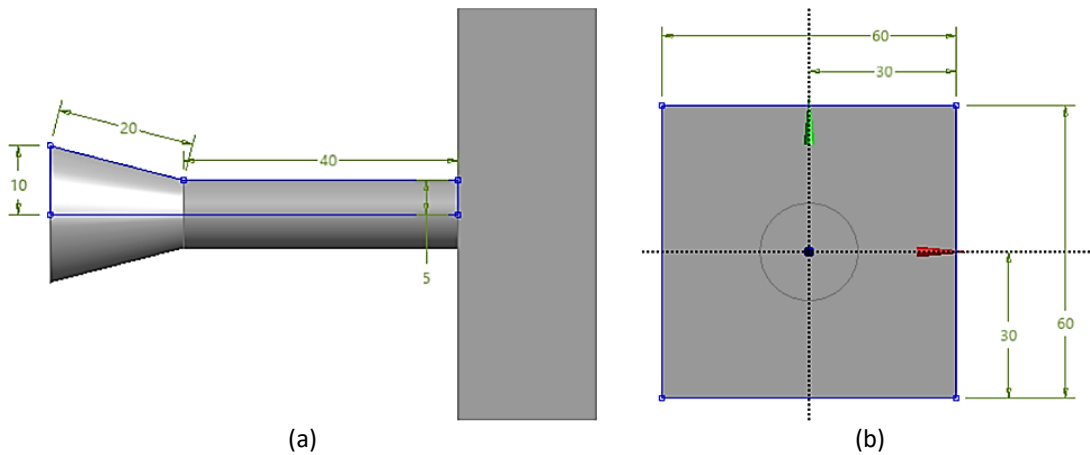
Detailed geometry specification (a) Side view of nozzle and plate (b) Back view of plate
